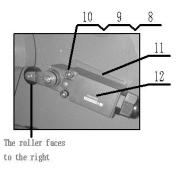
Inner travel switch assembly on tight side of upper pivot
